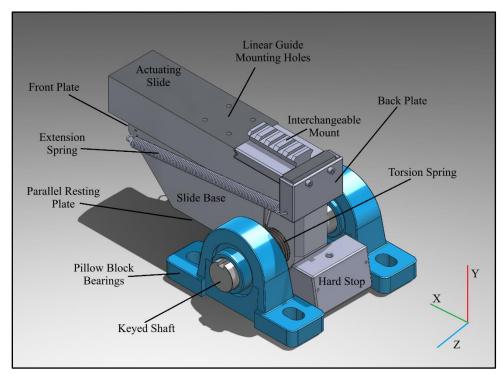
Mounting Mechanism in Resting Position with Labeled Components
